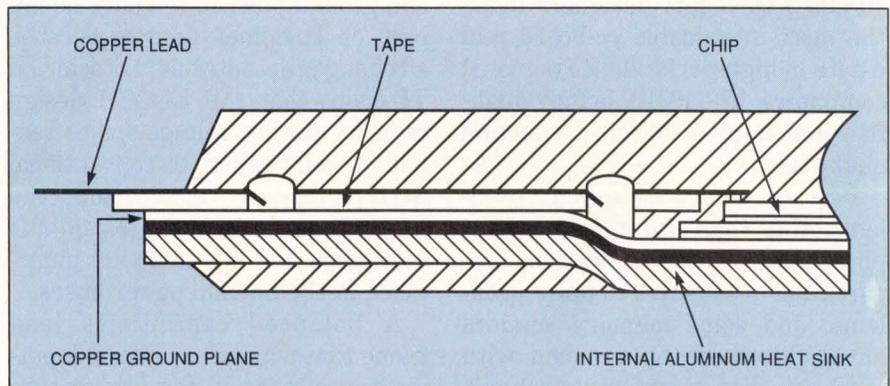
By utilizing an internal heat sink, the tape-automated-bonding package from Mitsubishi has a standard dissipation rating of 3W. You can increase dissipation to 22W by using an external heat sink and mounting the package upside down on the pc board.
